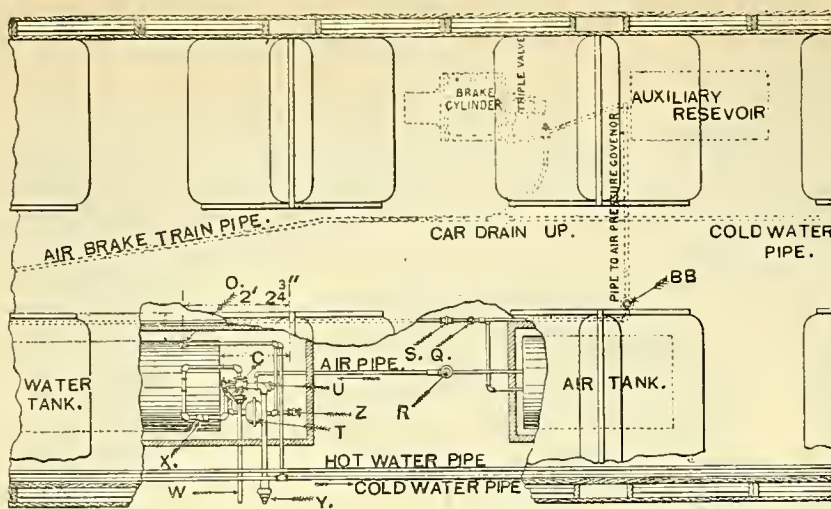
Part Sectional Plan, showing Piping and Connections between Air-tank and Water-tank.
